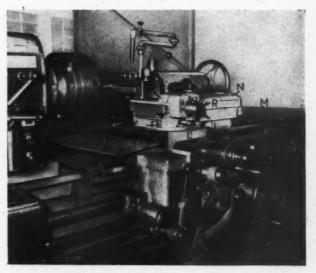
An IMOR type MVN lathe equipped with a Filematic thread-chasing unit, for cutting threads on adjusting screws of SAE 8620 steel
